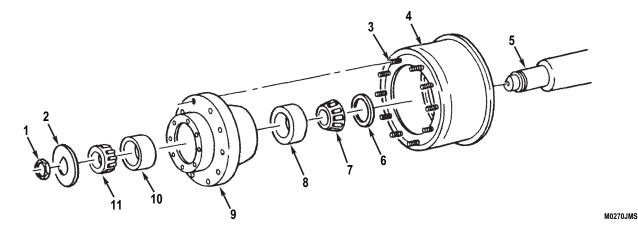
Hub, Brakedrum, and Wheel Bearing Installation.
